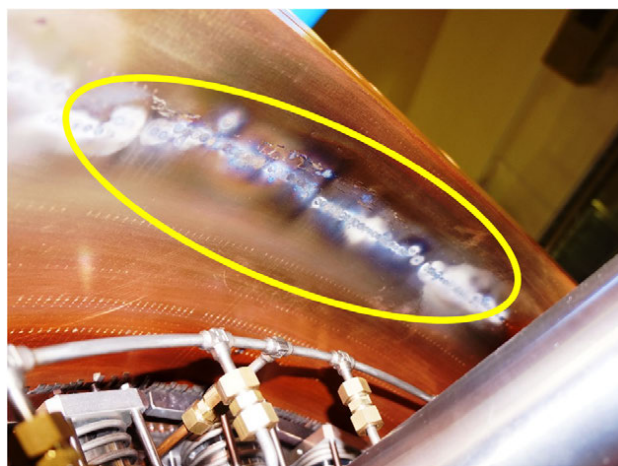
A picture of the damaged 1st RF cavity. The contact fingers were melted and adhered to the cavity wall.
